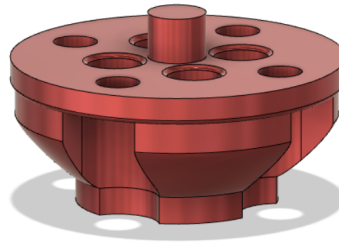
3D-model of the linkage components that connects the different sensors together. Shown here is *LinkageType4*, it has the benefits of being one continuous part, but it had mounting difficulties that would result in the part being tall
